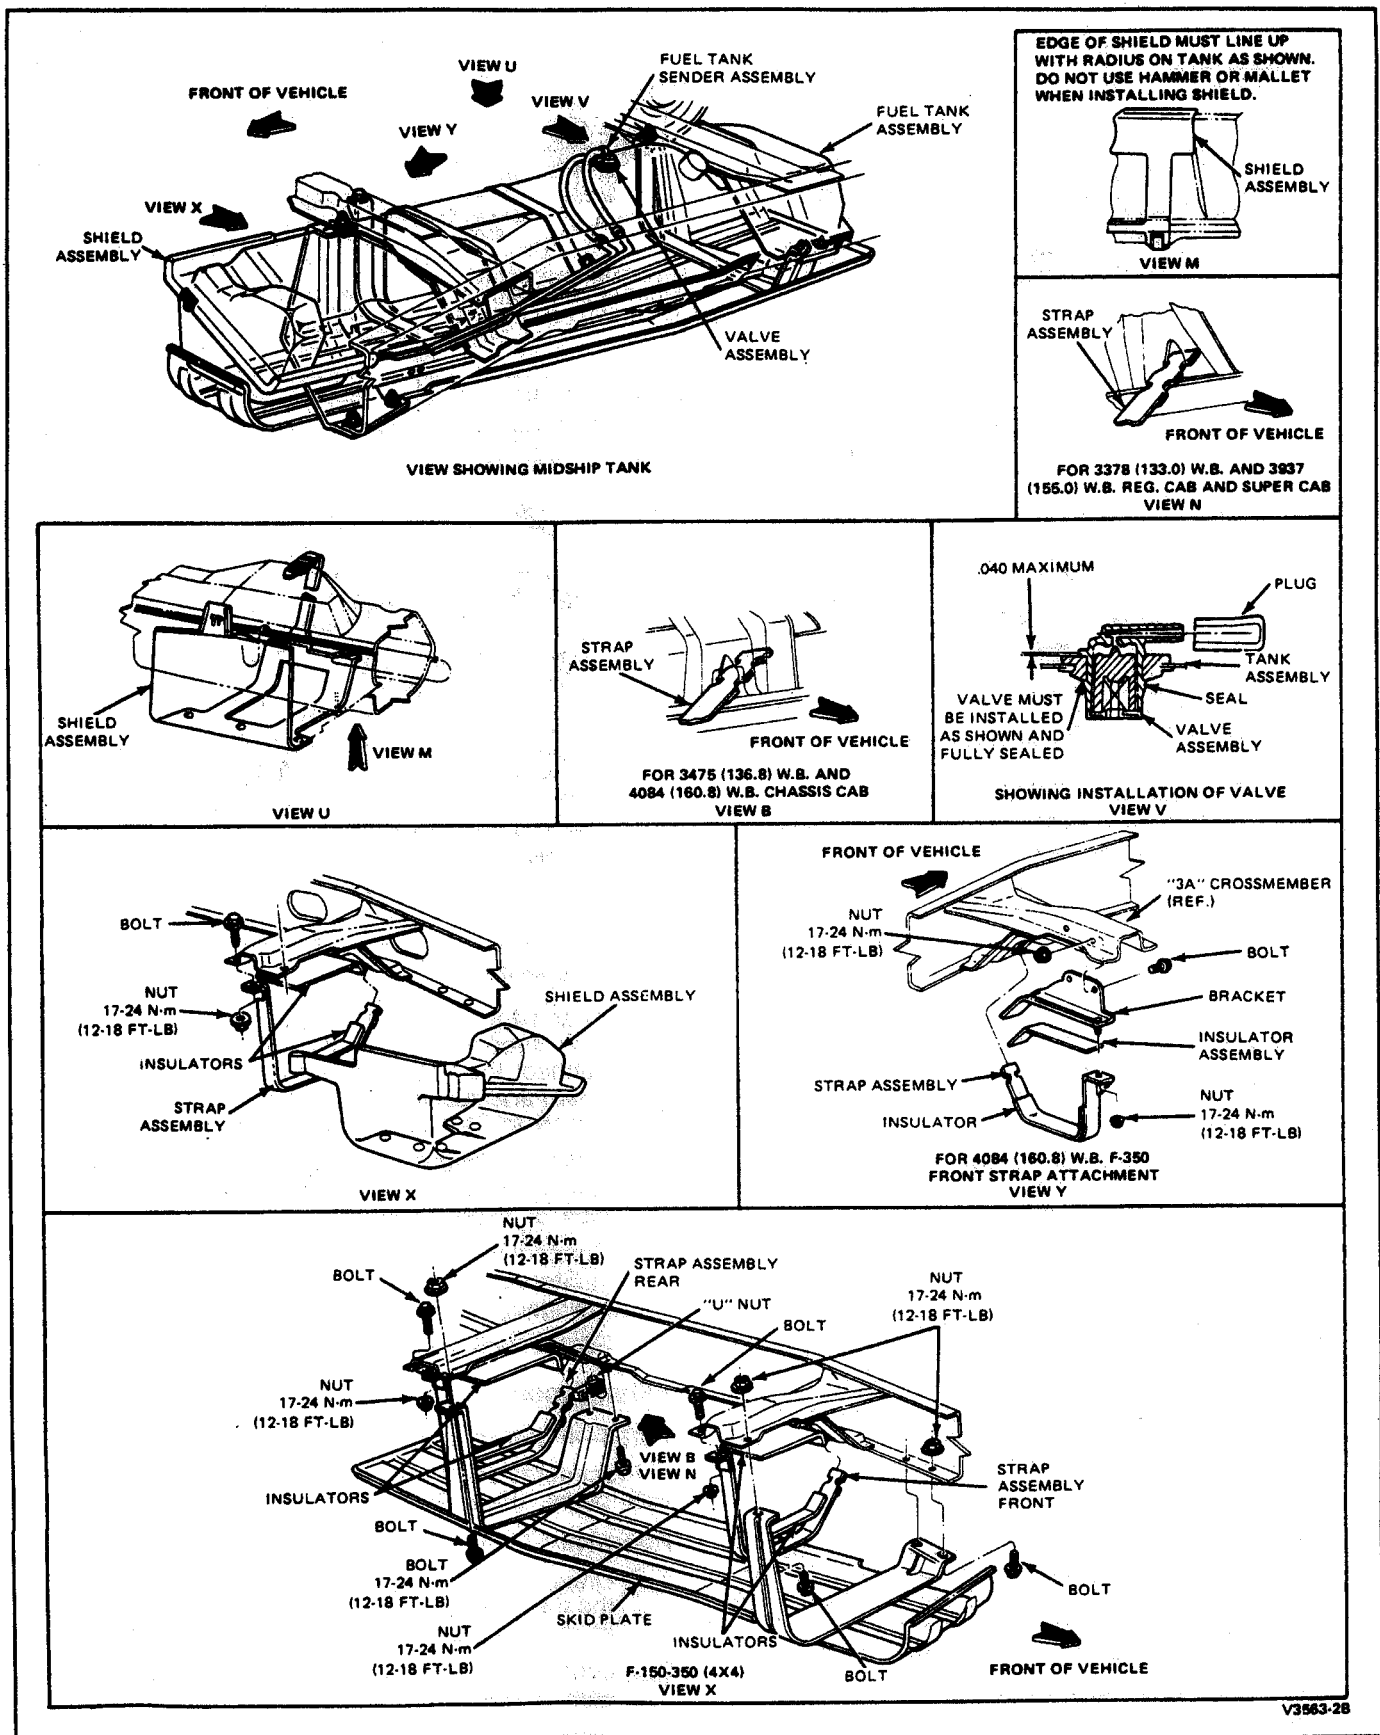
Fuel Tank Installation—Midship 19 Gallon Fuel Tank—F-150—F-350
